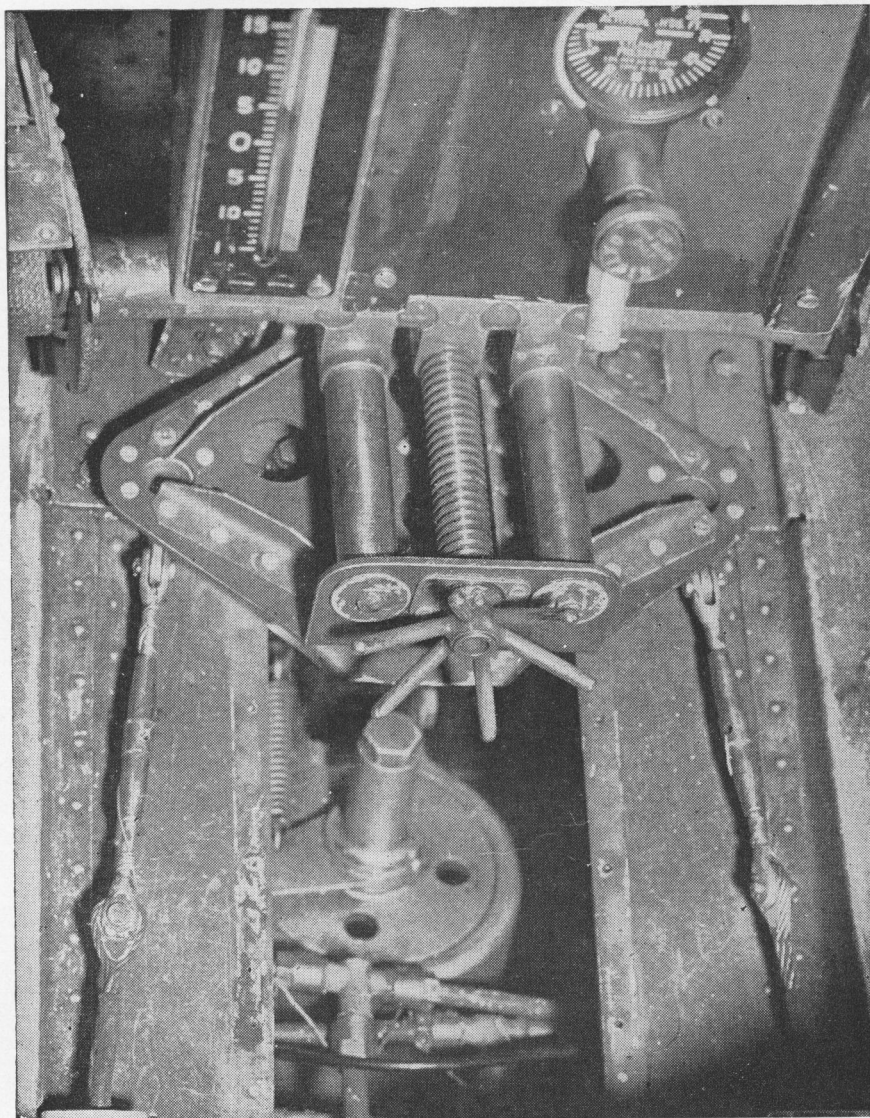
Fore-and-aft adjustment of the rudders is made by turning this six-spoke wheel which turns a screw to move the entire rudder bar, a simple bent tube welded to a bracket attached to a diamond-shaped plate which contains typical lightening holes.
